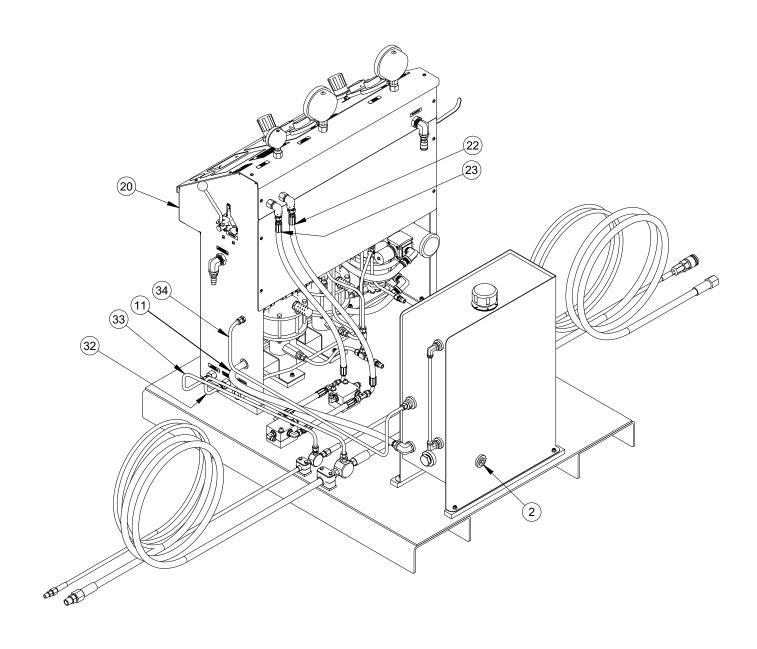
UFV-24-300T REAR CONSOLE ASSEMBLY (P/N 91681)
